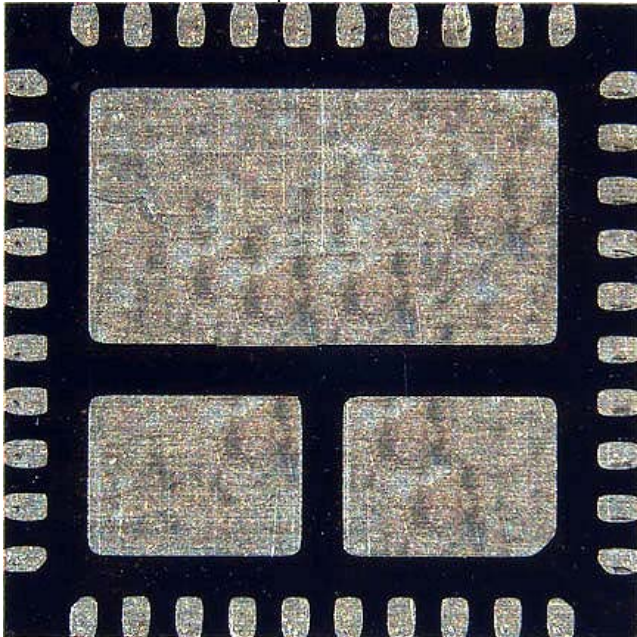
Bottom side view showing pads for 6x6 DriverMOS
